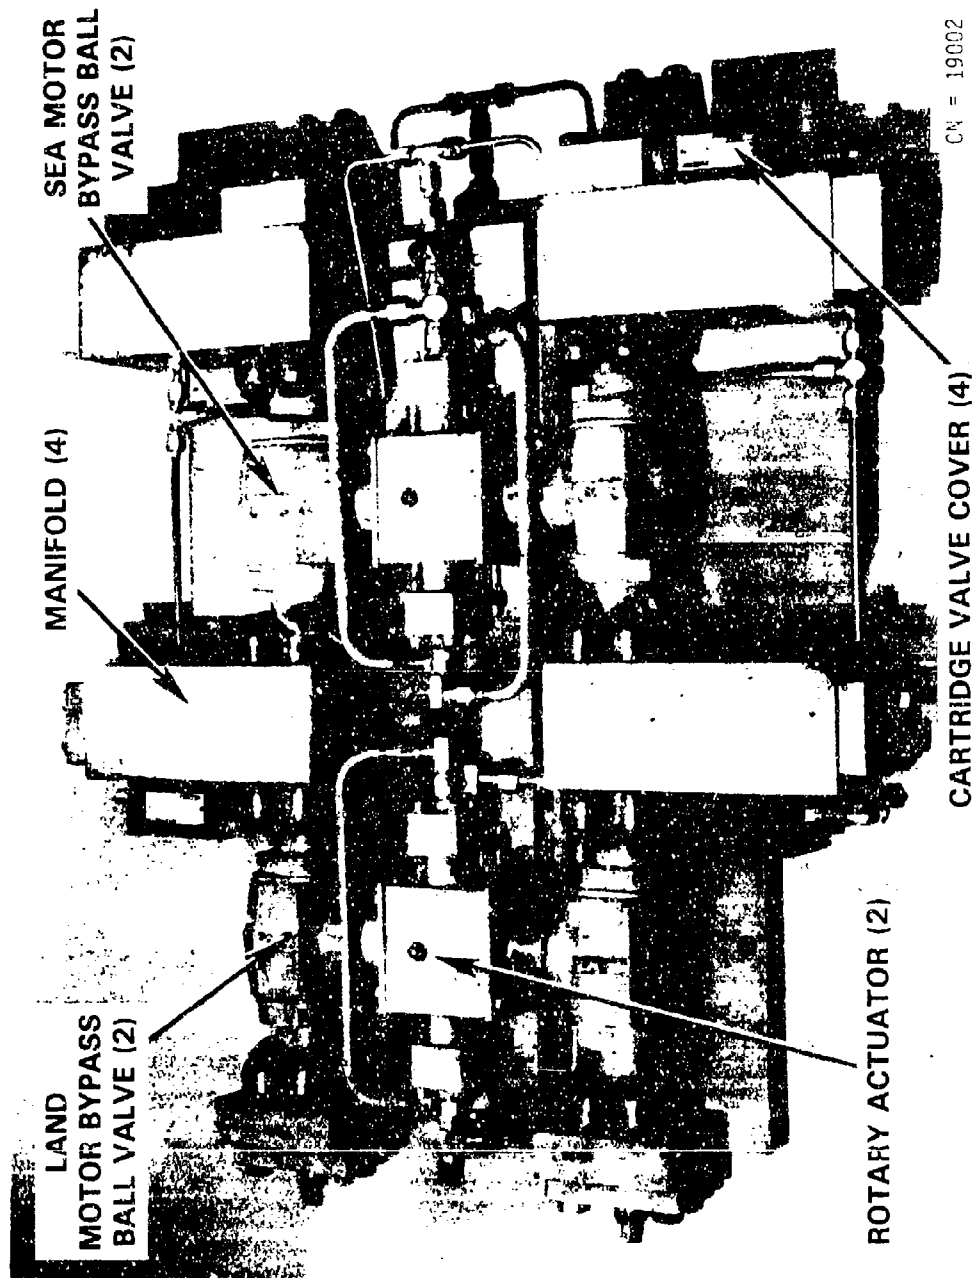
Hydrostatic Drive Mode Control Valve Assembly
